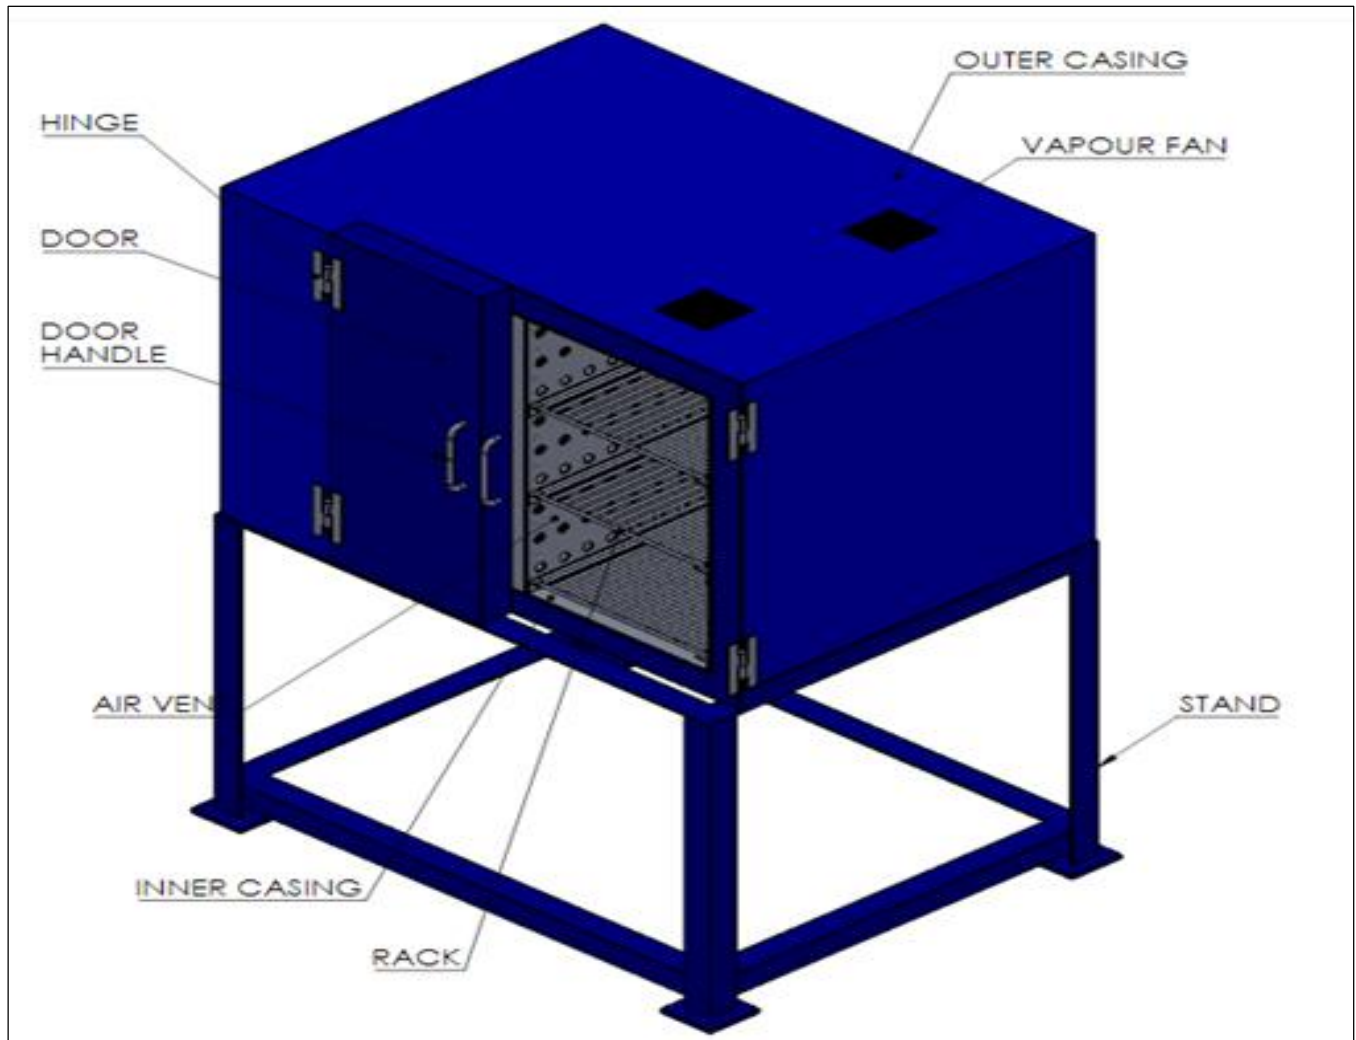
The Isometric view of the developed Cabinet Drying Machine
